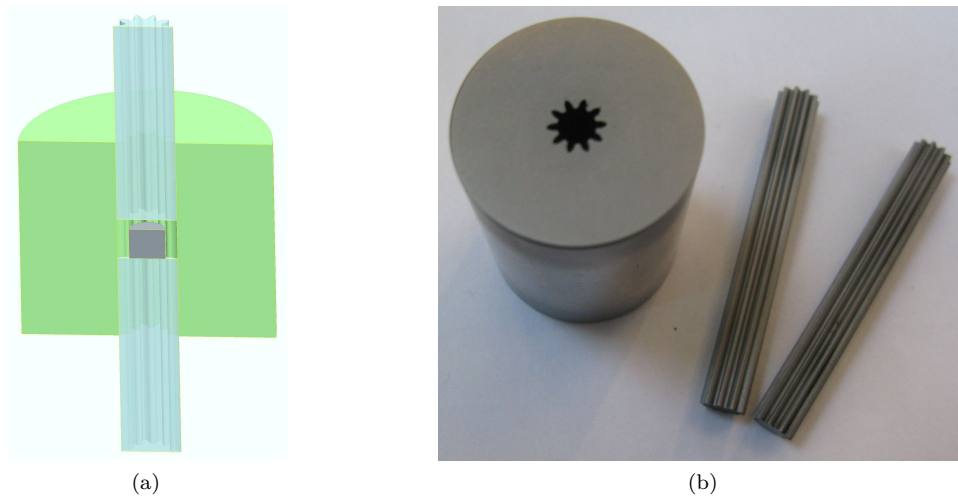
CAD model of the closed die forging tool system (a) and a photograph of the constructed tool system (b). The bulk metallic glass billet, colored gray, can be noticed inside the die in figure (a).
